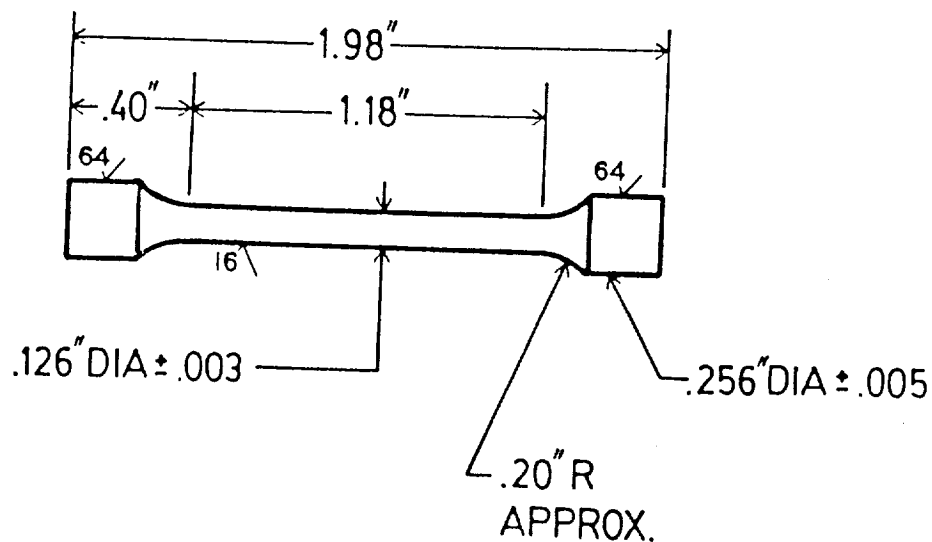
The standard tensile specimen used for mechanical testing.
